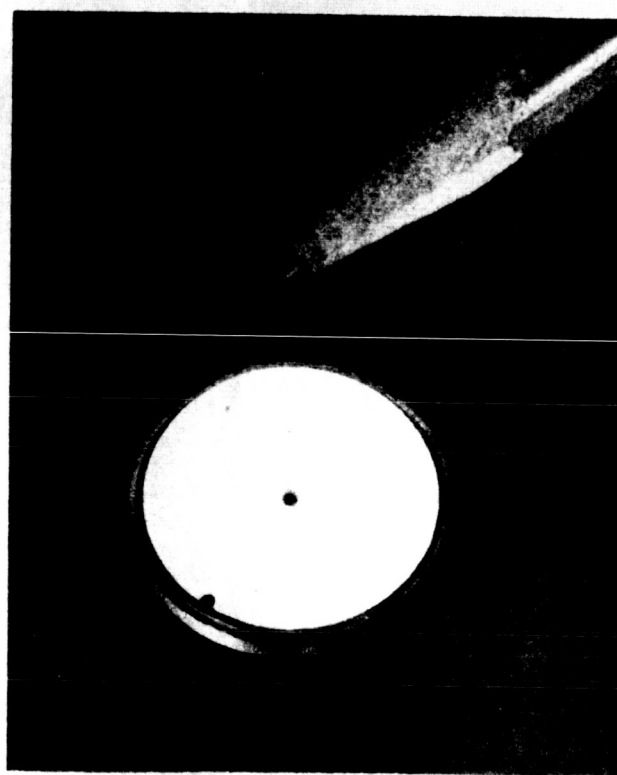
Chem-milled Modulator Blank, with Aluminized Chem-milled Inner Surface. (Processed as per Figure 8B)
